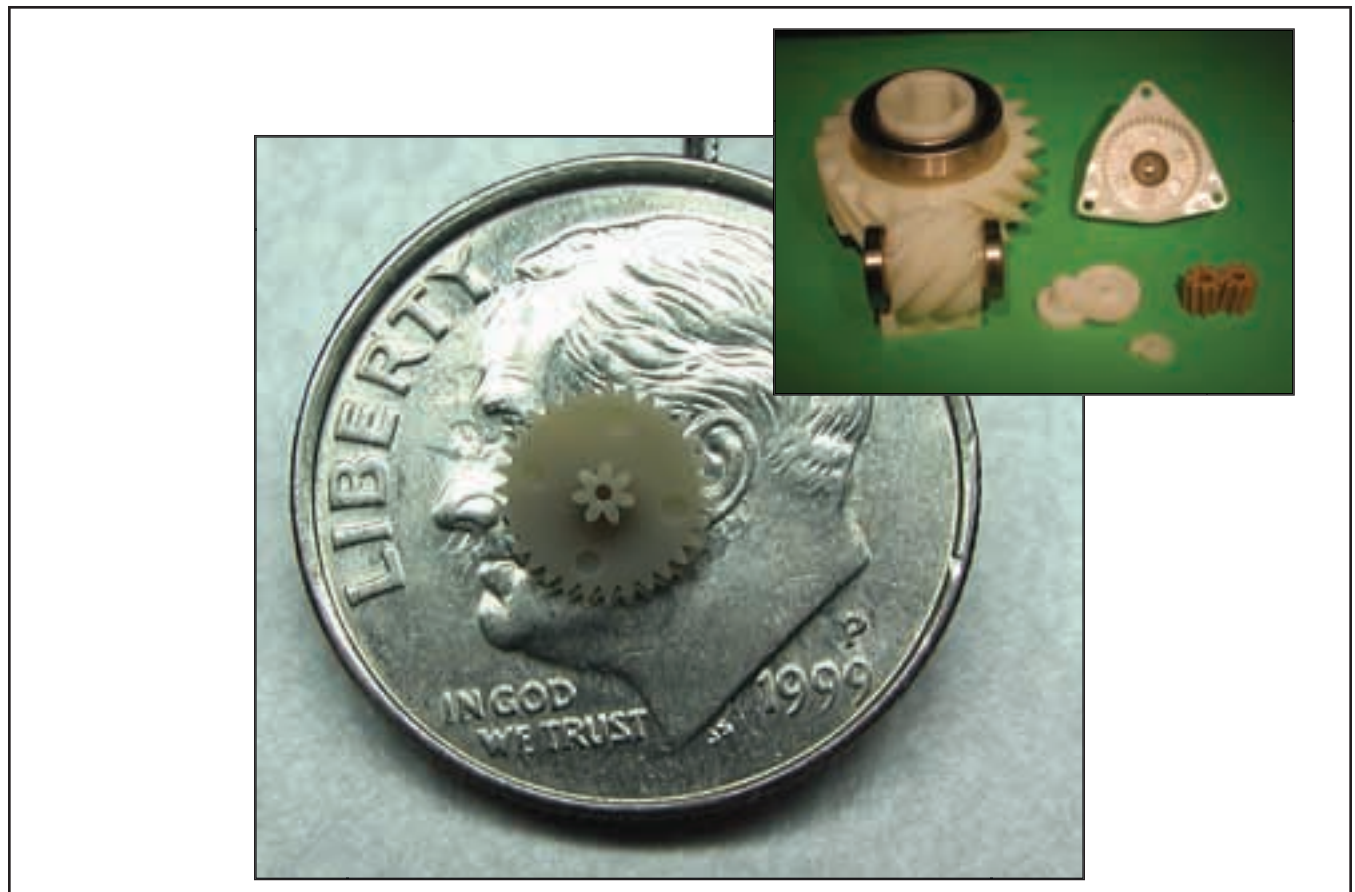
Molded gears can be made in many forms and varied sizes. A very fine pitch gear is shown in the larger image.
